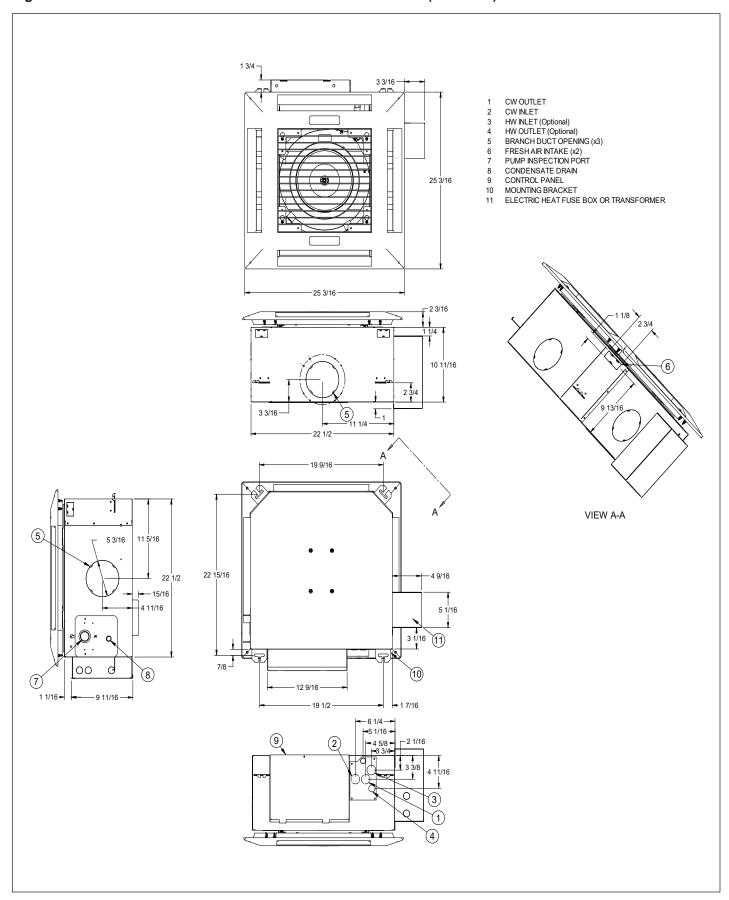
Dimensions - Medium Chassis: CCW18 and CCW20 (in inches)
